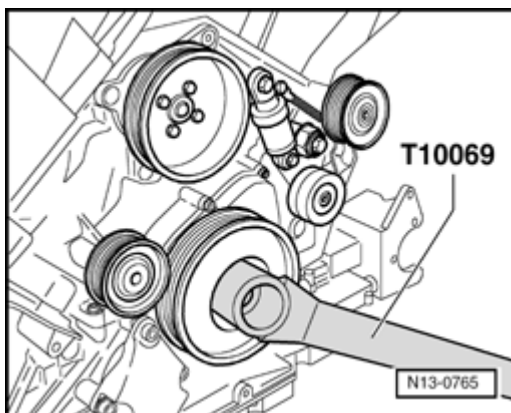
Loosening/Tightening Securing Bolt, Lock Vibration Damper Using Counter-Holder Tool T10069
